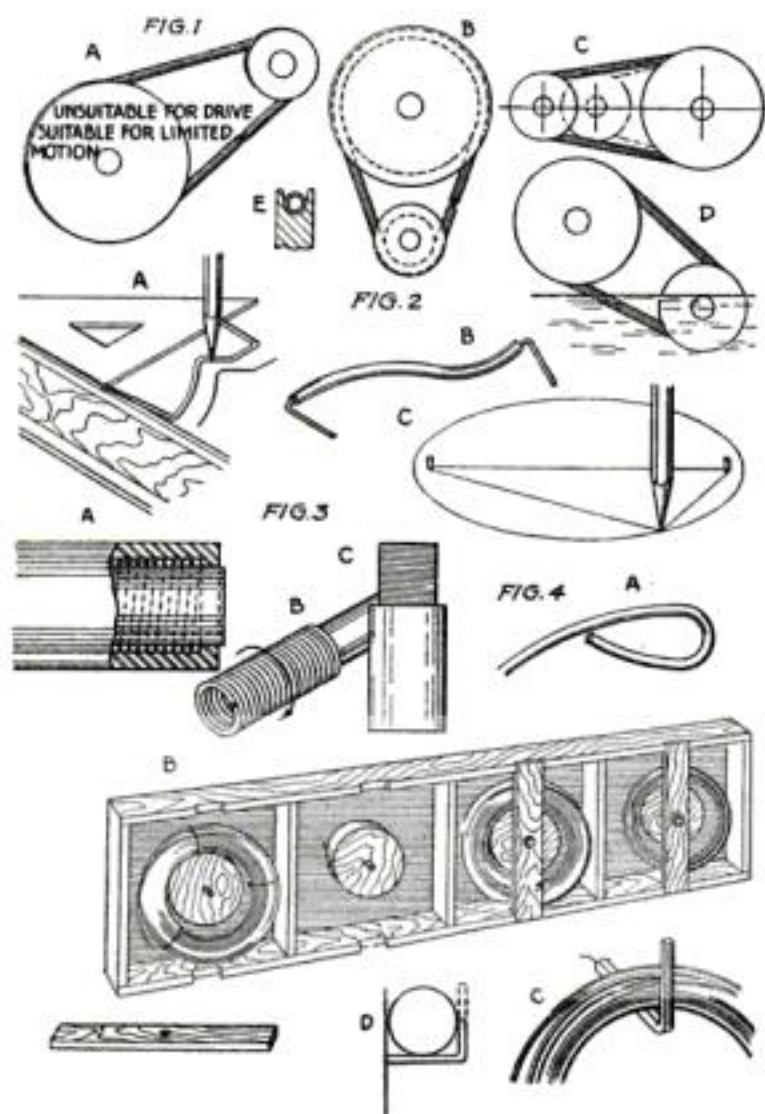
Coil wire drives. Fig. 2. Wire as an aid to draftsmen. Fig. 3. A strong cylinder. Fig. 4. Hints on handling wire.
